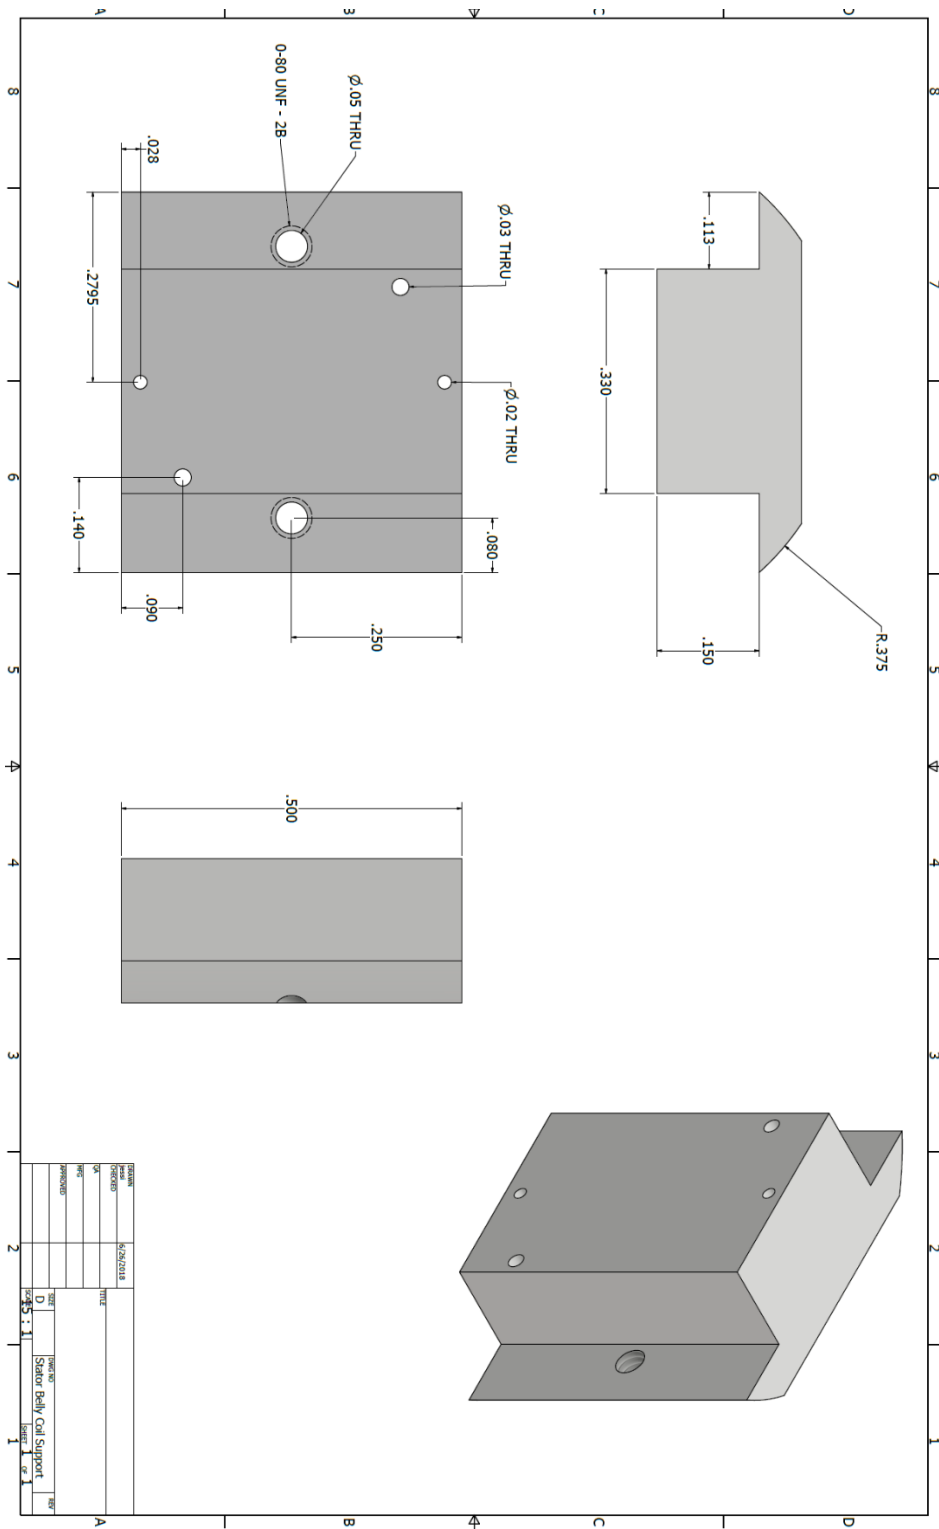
Machined cross-coil platform for spinning assembly (PCTFE).
